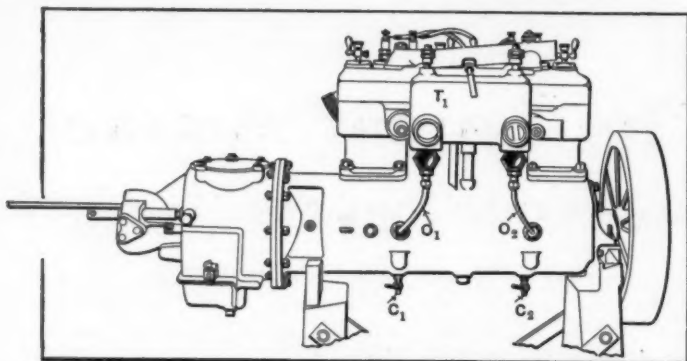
Right hand side of the unit type of power plant presenting the oiling system and other details
